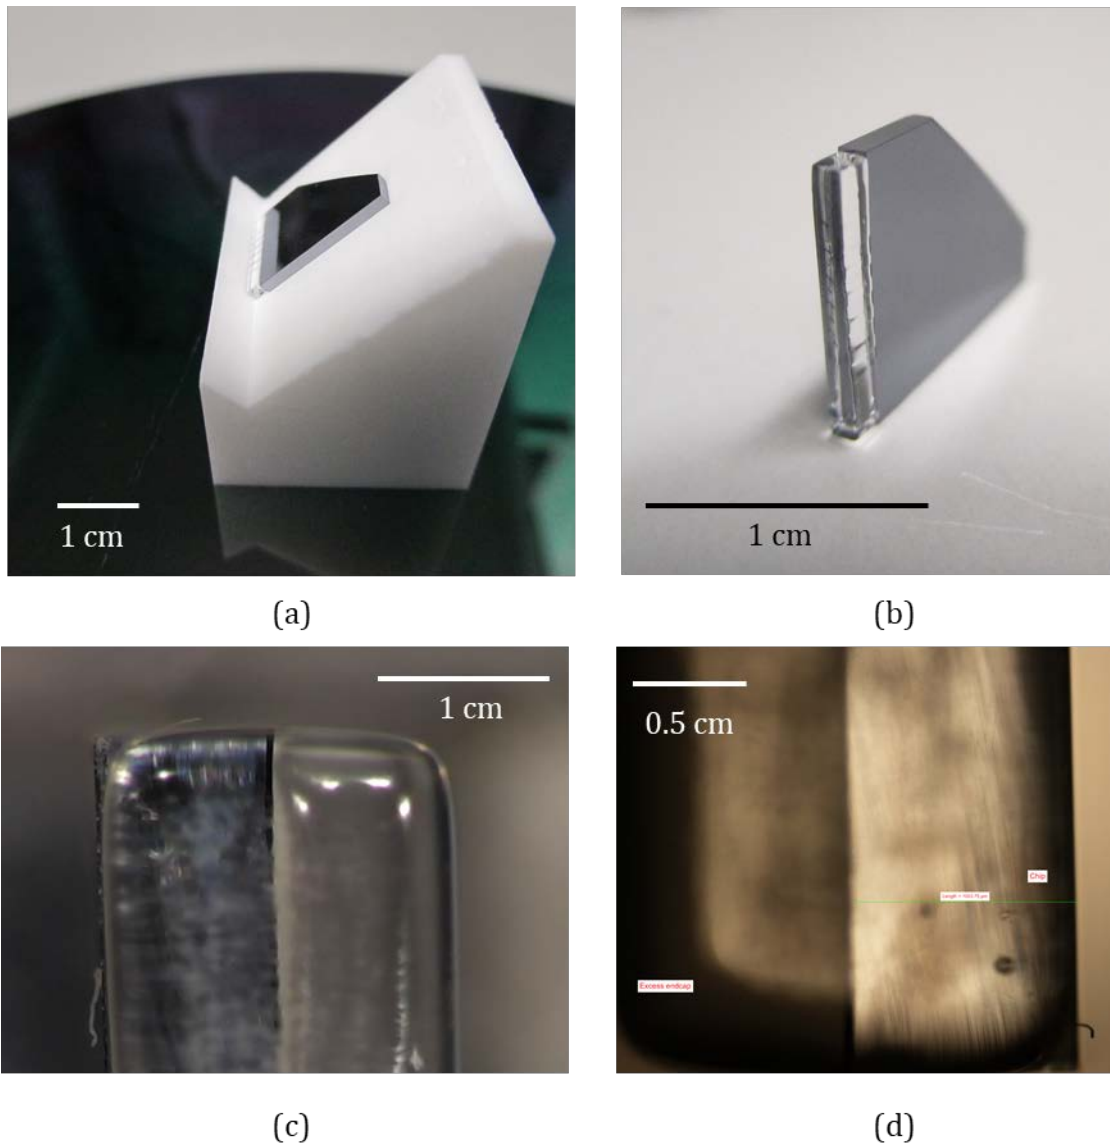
(a) Chip and endcap mounted on Macor[®] jig prior to thermal processing. (b) SoS chip with thermally bonded endcap. (c) Endcap inspection under optical microscope showing the rounding of the edges of the endcap. (d) Optical microscope image of the chip-endcap interface, revealing no cracks or air bubbles from thermal processing.
